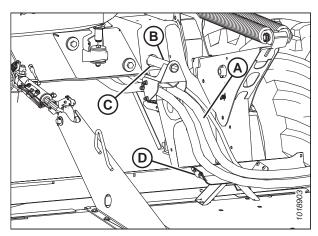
R1 Series Rotary Disc Header Hose Support Attachment
